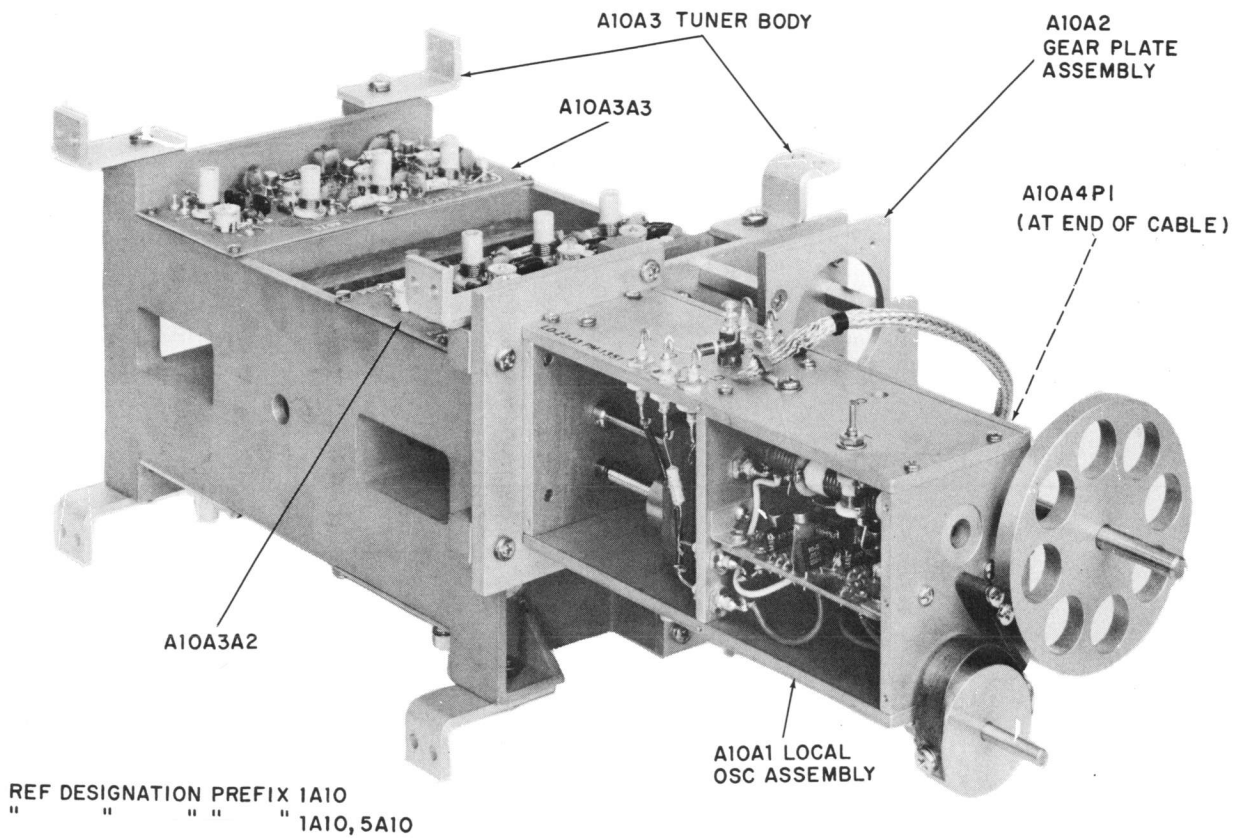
Major Component Locations, Tuner Assembly 1A10
